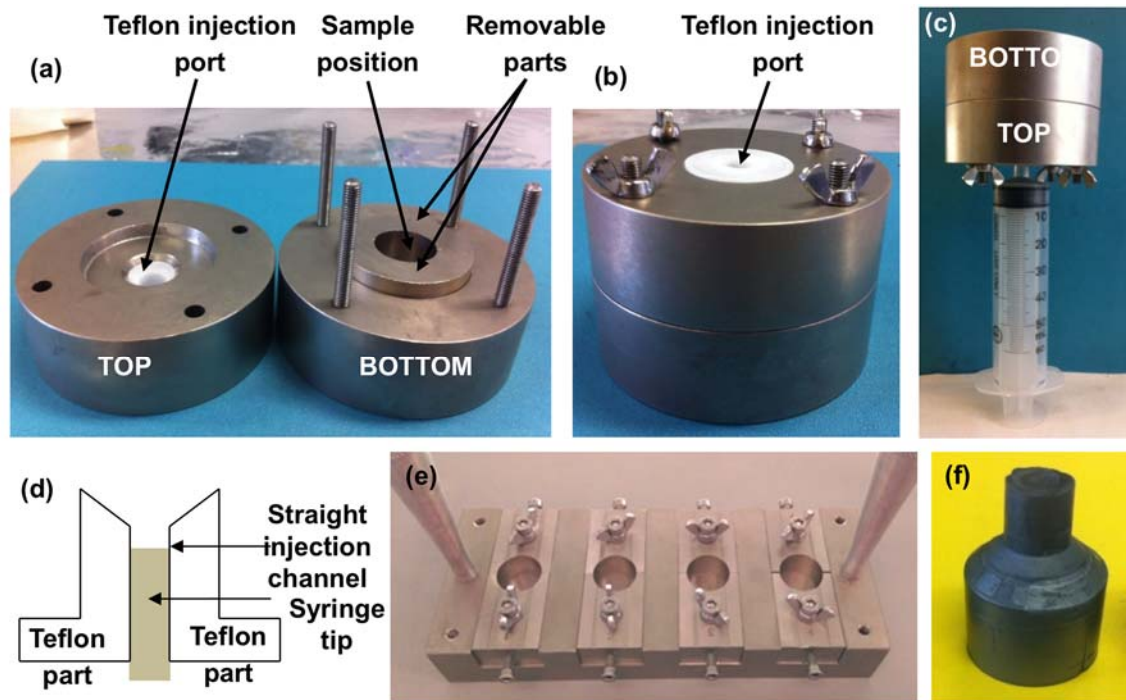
Molds used in this work; Closed-cavity molds (a-d) and open-cavity molds (e). Parts c and d show the filling of the closed-cavity molds with the suspension. (f) Example of cylinder produced using the mold shown in parts a to d.
